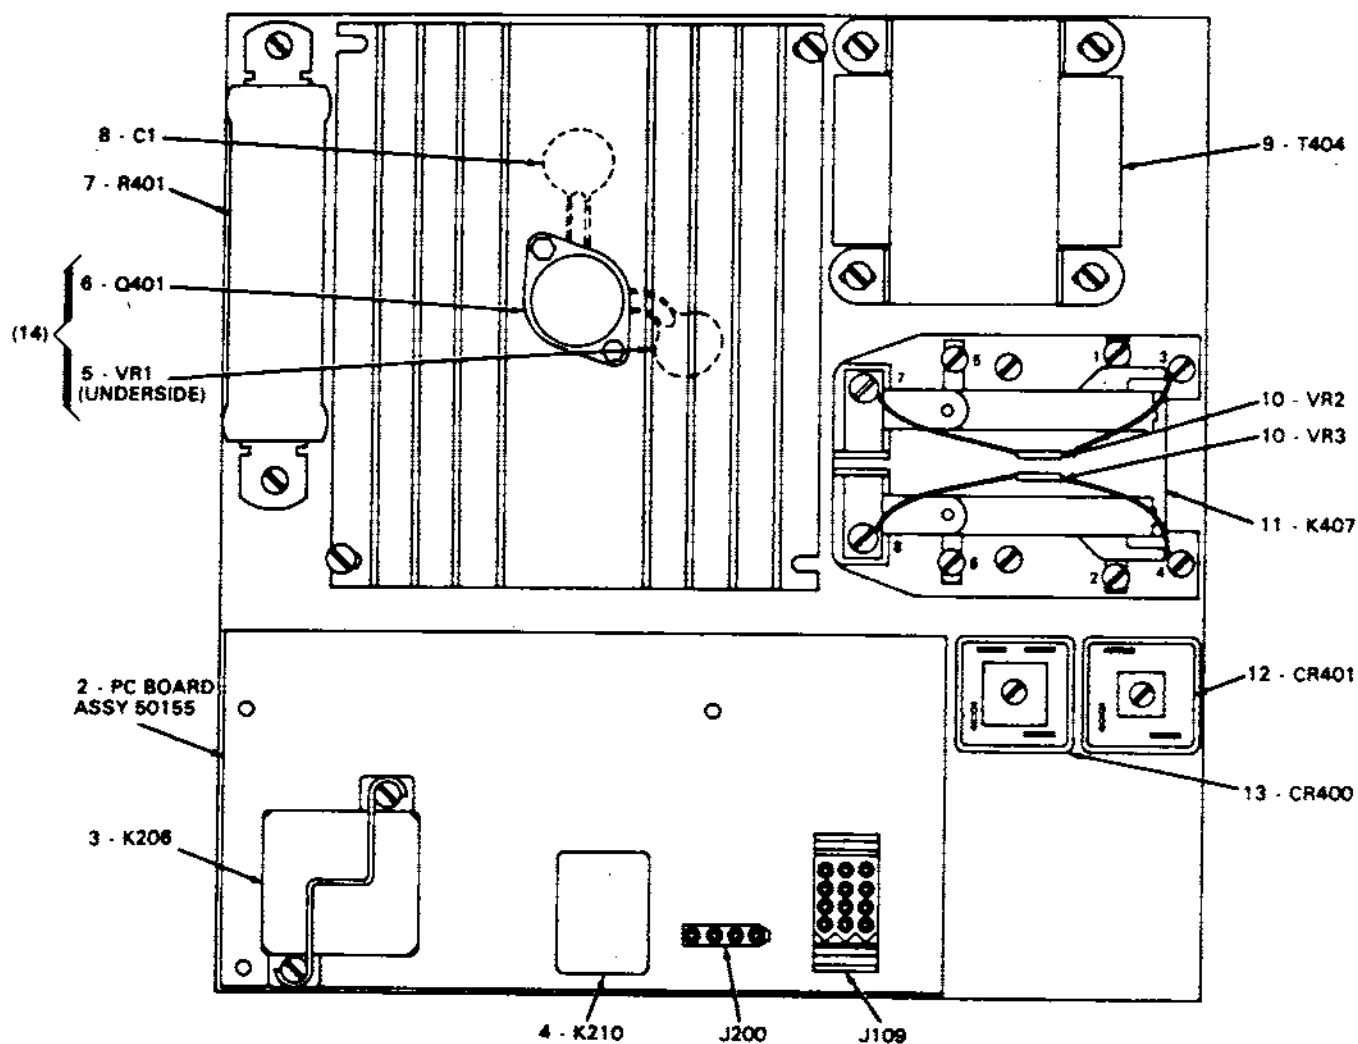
RC-5B Parts Location: Automatic Rate Controller, Control Panel
